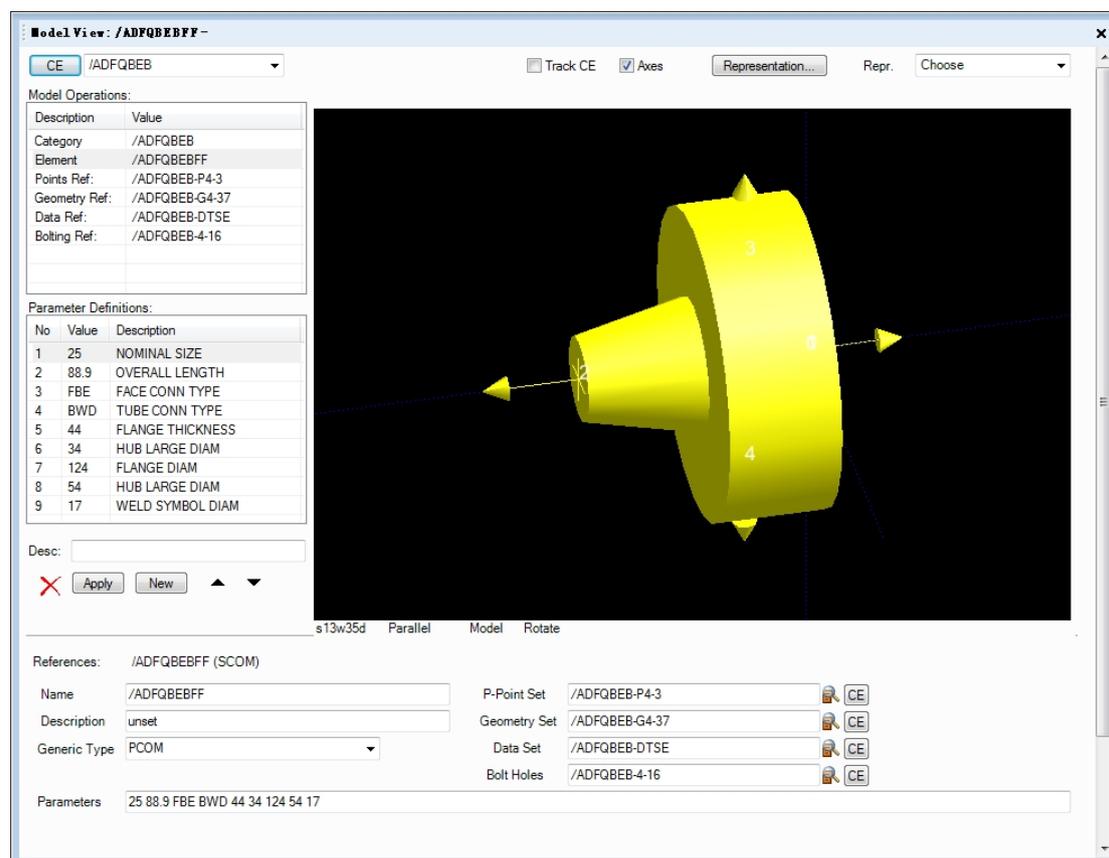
Weld Neck Flange in Paragon module
